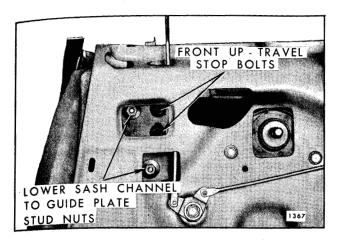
Rear Door Window Removal – 68069–68169 Styles
